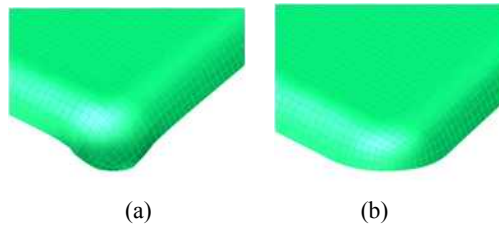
Comparison of formed shapes with respect to the initial blank outline: (a) corner radii of the blank = 3.5 mm; (b) corner radii of the blank = 5.9 mm;
